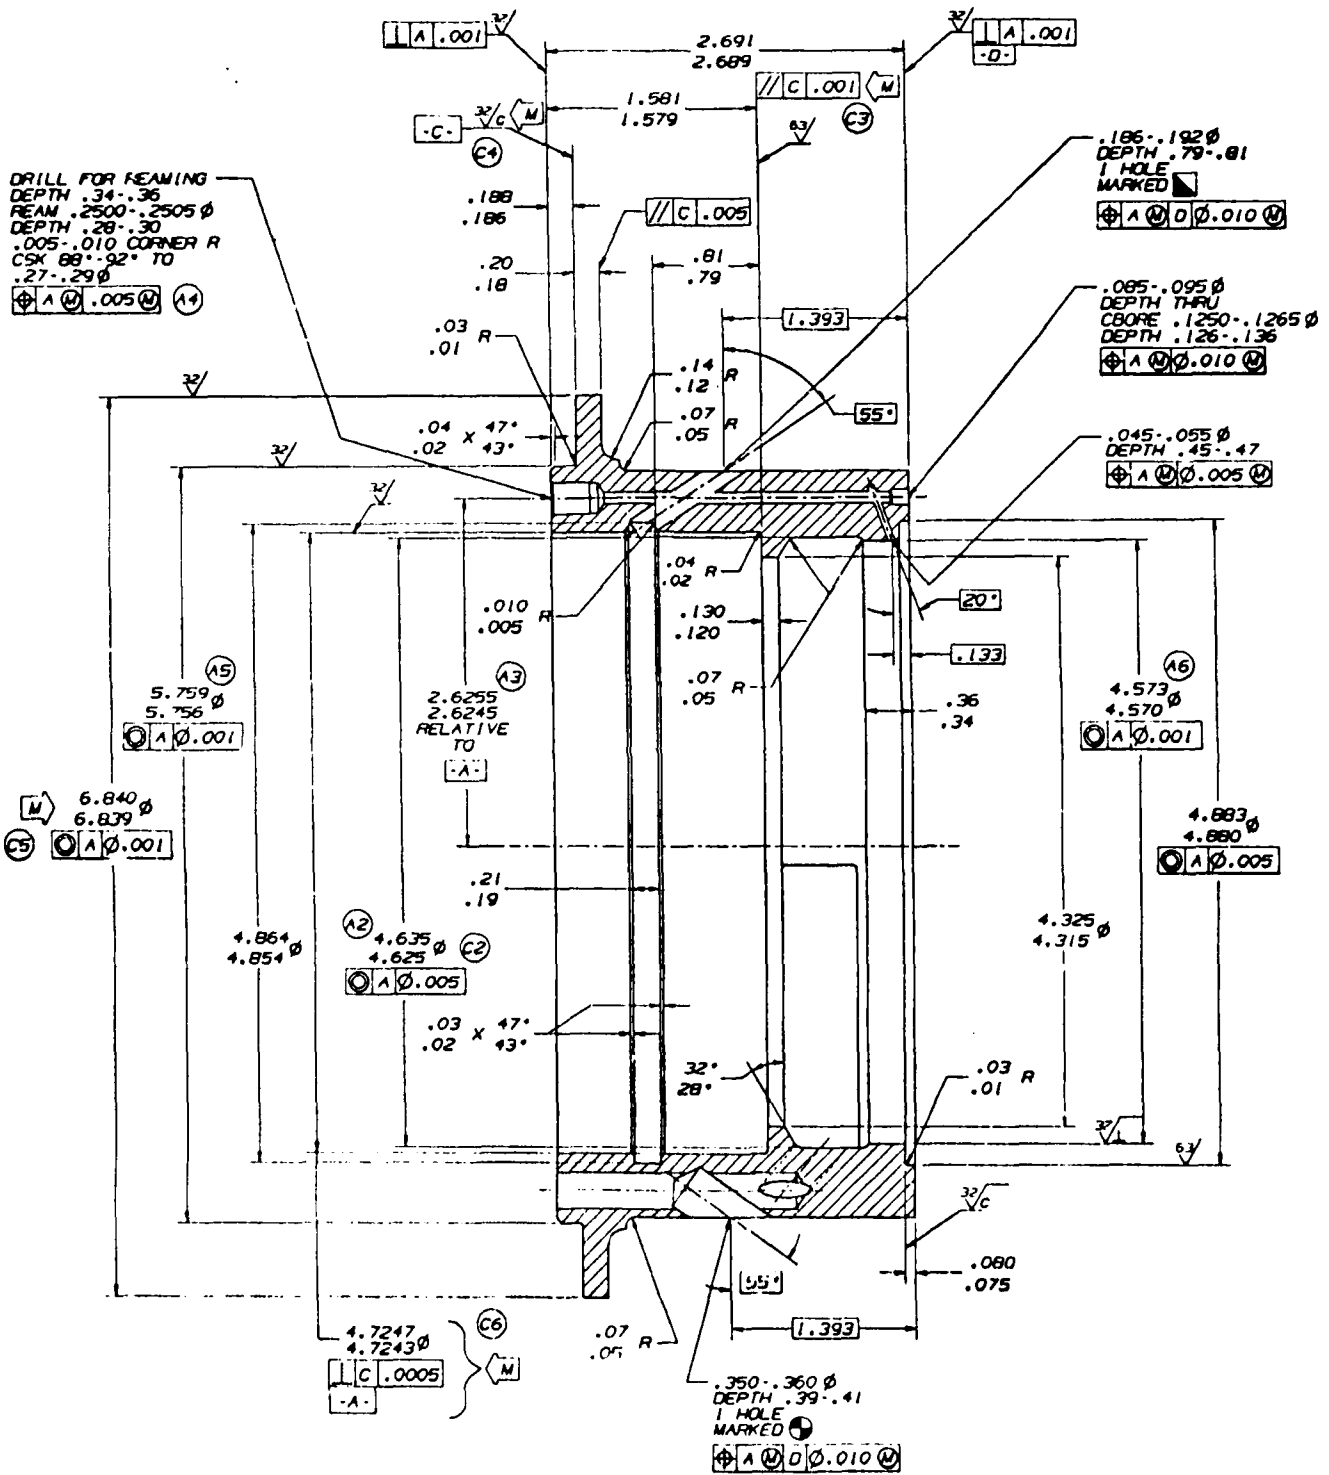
TEXTRON LYCOMING TURBINE SUPPORT BEARING HOUSING CURRENTLY MACHINED FROM FORGED RING.
